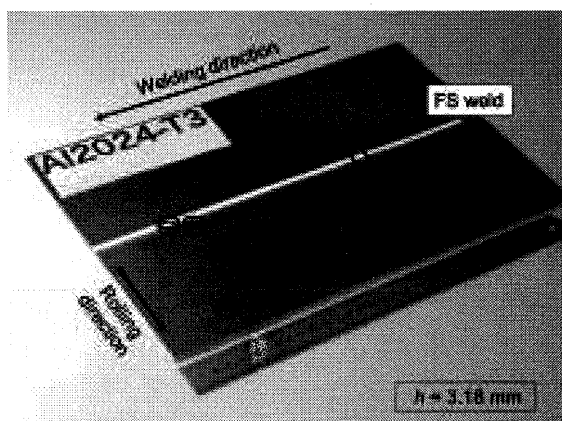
Picture of FS welded AA2024-T3 butt joint and specimen locations
